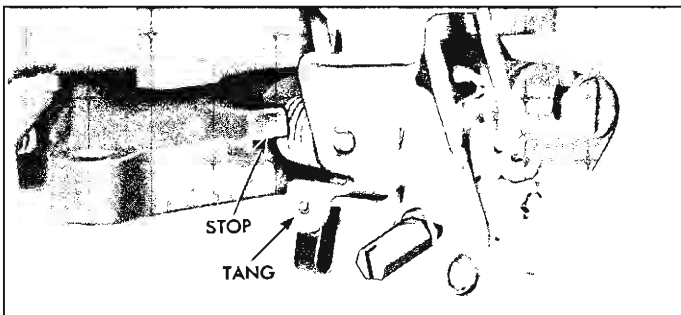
Checking Throttle Linkage Adjustment—Rochester Four-Barrel
